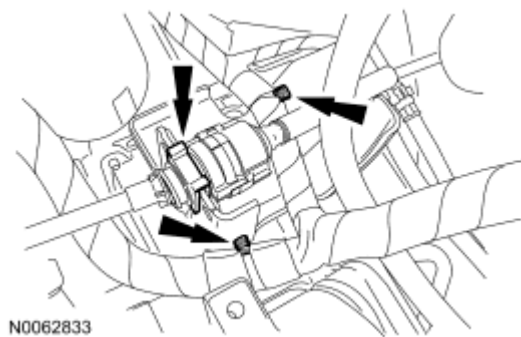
Identifying Control Cable And Pin-Type Retainers
